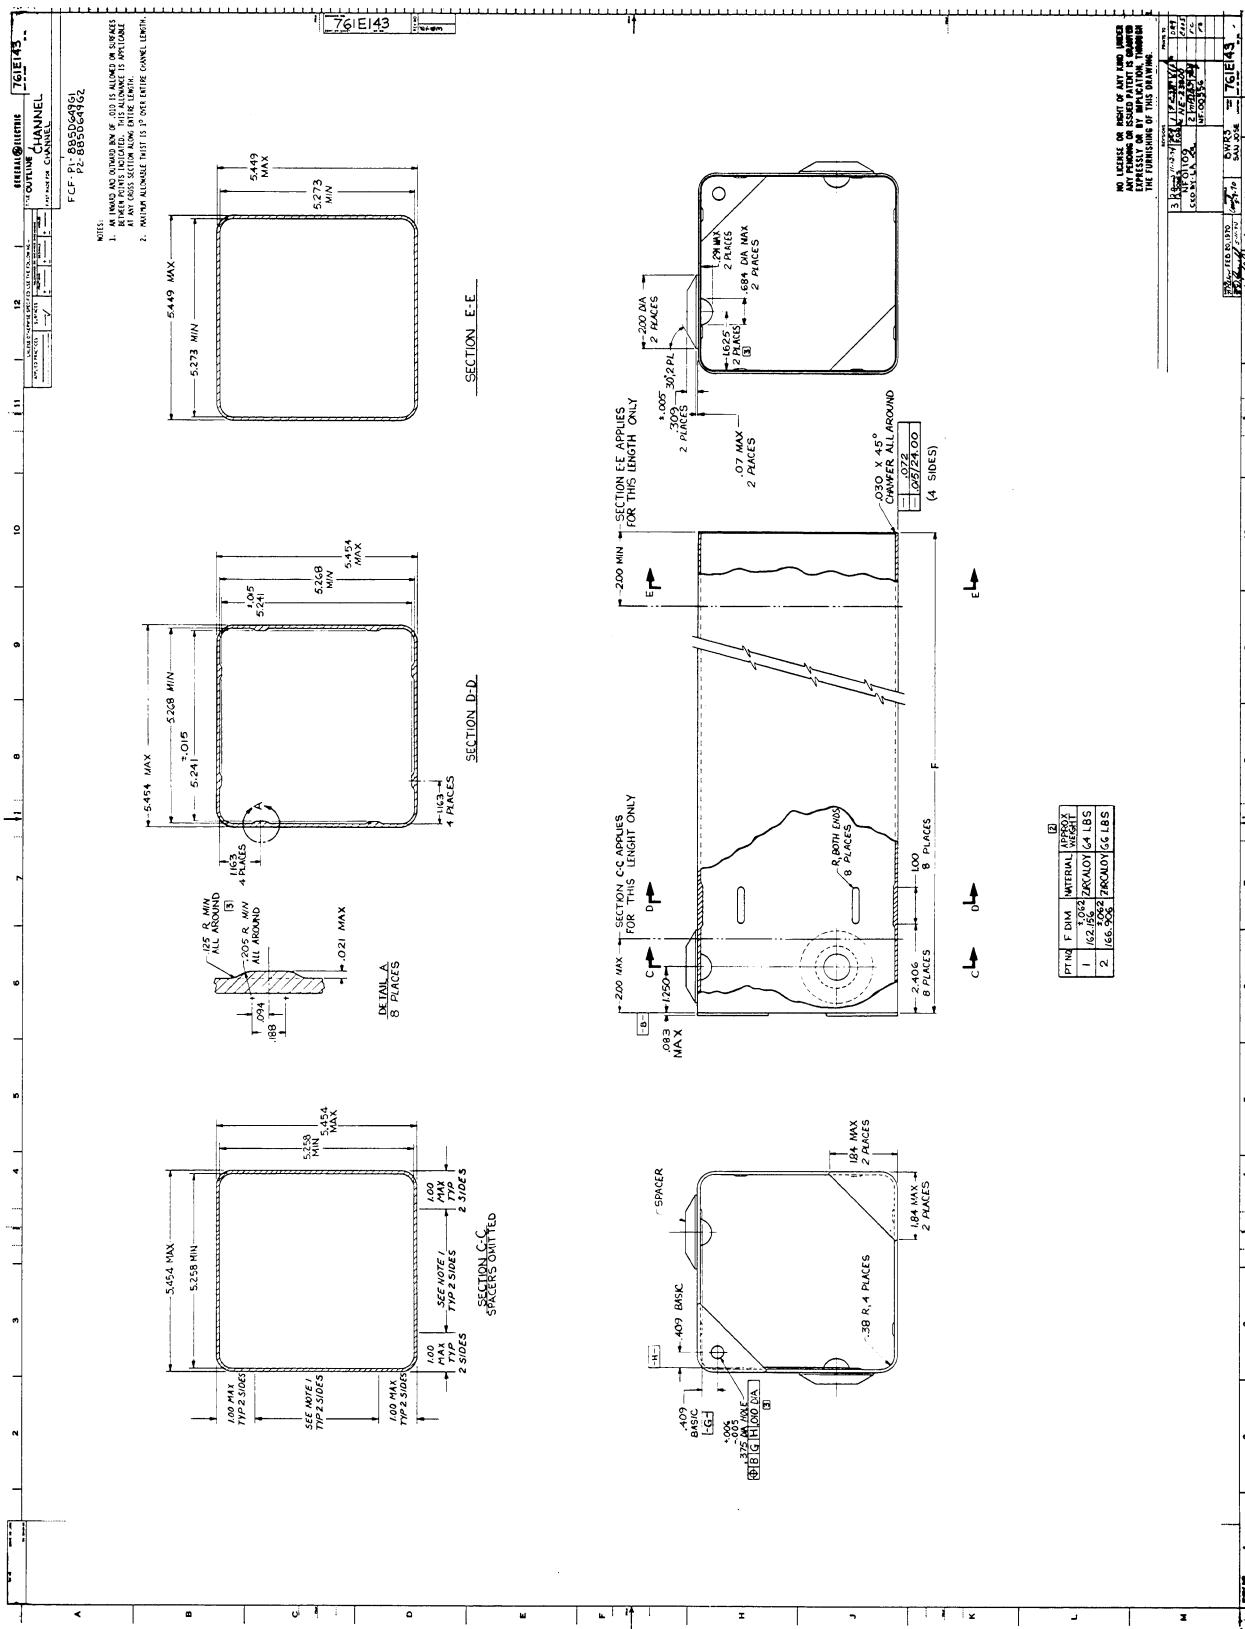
Channel Outline Drawing for Use With Initial Fuel
